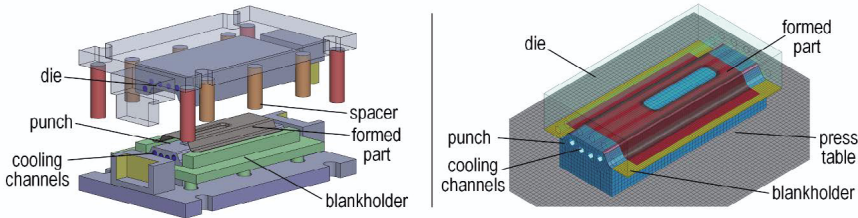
left: CAD model of hot stamping tool; right: FE-Modell with elastic tools and press table
